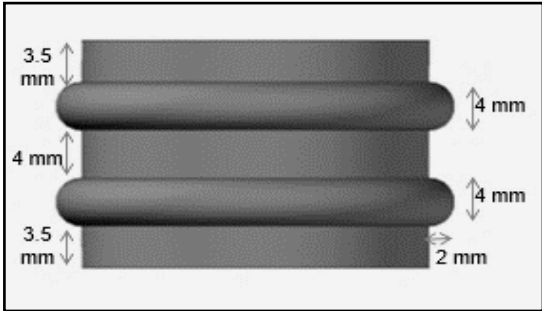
Ribbed Head dimensions (Specimen - R2L19)
